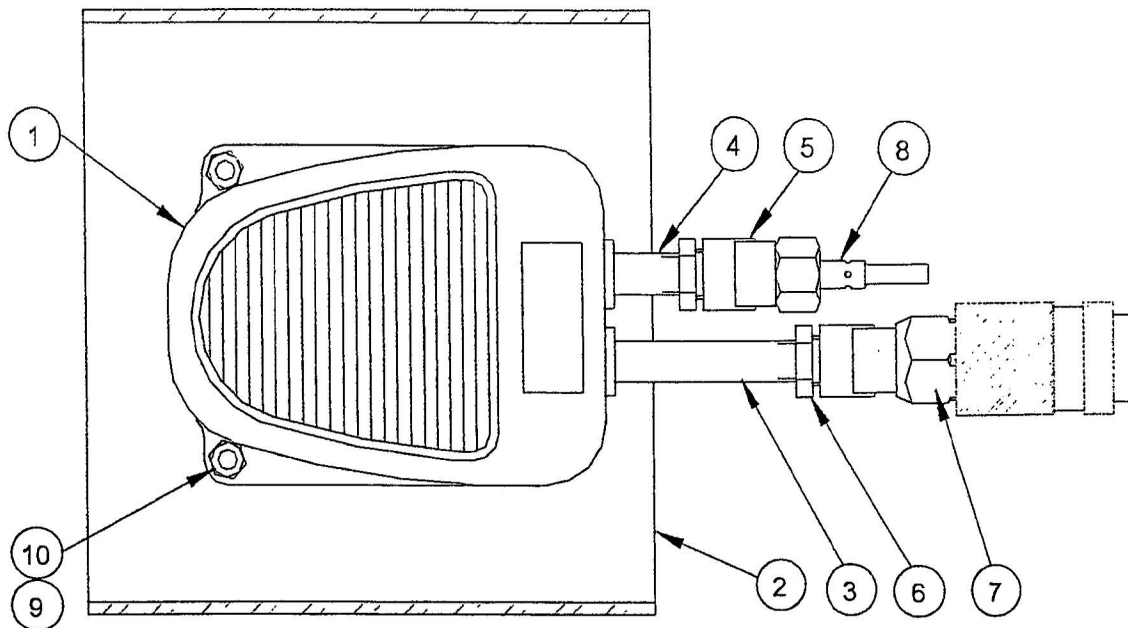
FOOT PEDAL ASSEMBLY - DWG-A-19007-1
